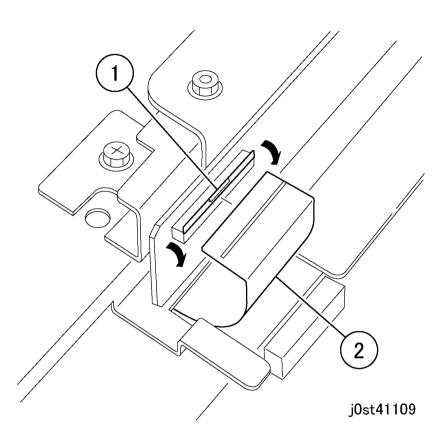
Disconnecting the CCD Flat Cable (j0st41109)
